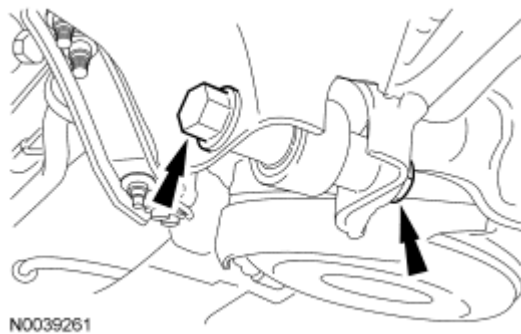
Locating Rear Shock-To-Trailing Link Lower Bolts
